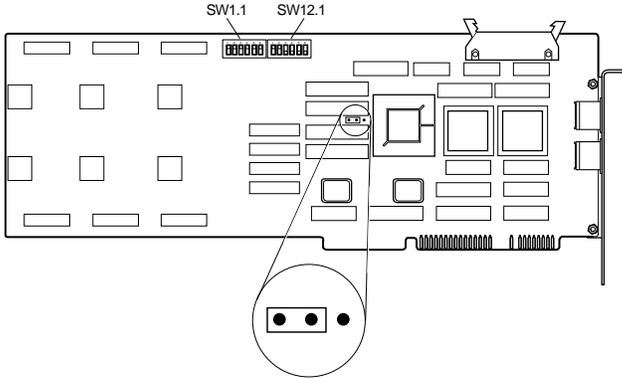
Location of Jumpers and Switches on IVP4 Boards
